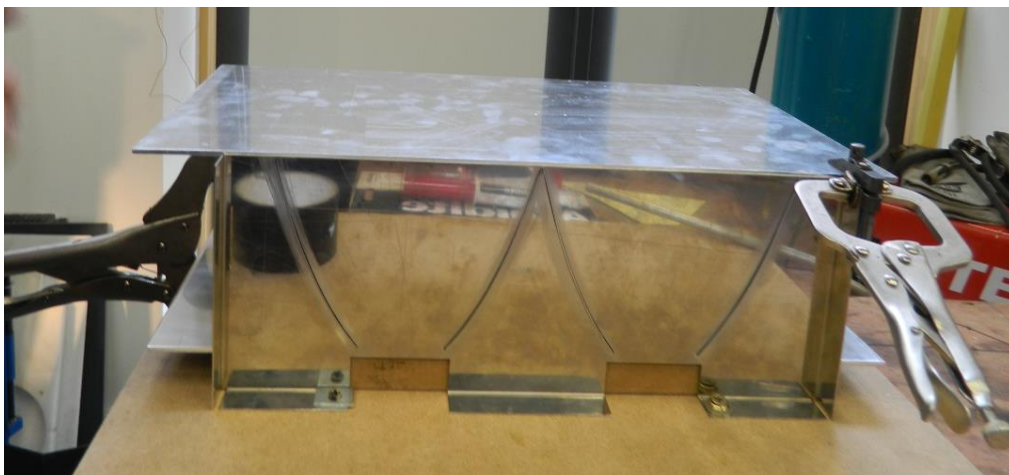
Showing the assembling of the twin SRCPC using clamps and vice machine
